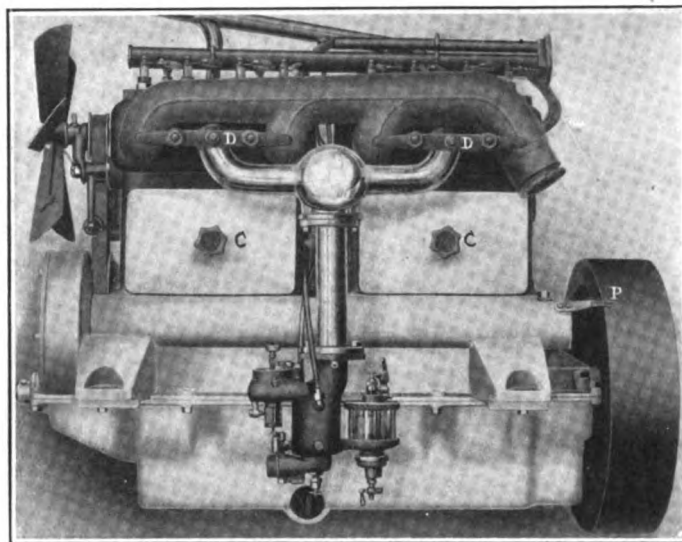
Left side of the Selden motor, showing the location of the carburetor and manifolds
